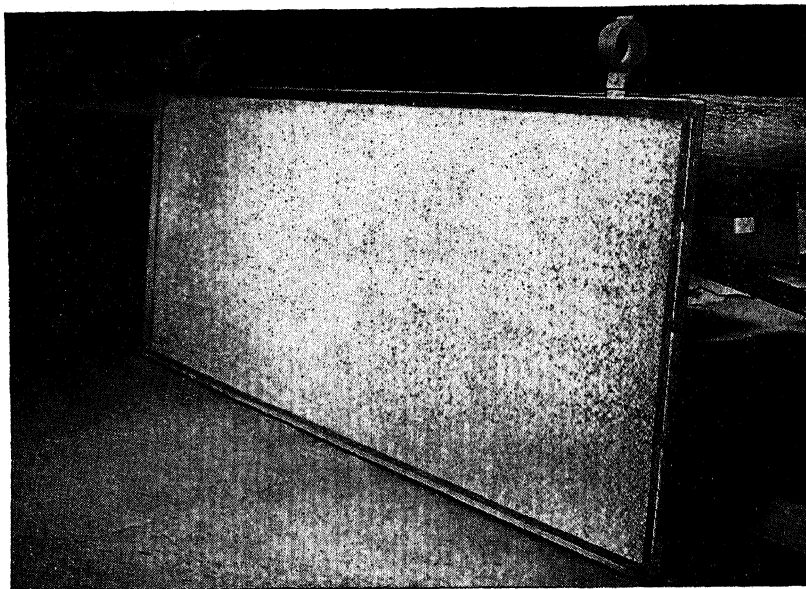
Sign frame of simple arc welded construction comprising a sheet of galvanized iron framed by one-inch angle iron welded all around on both sides.
